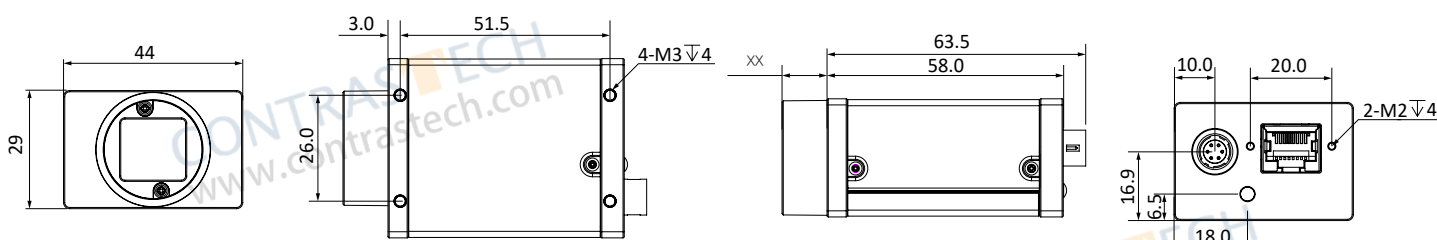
Mechanical Dimensions (in mm) for GigE Cameras with four-sided mounting 29 \* 44 \* 58mm flat housing.
